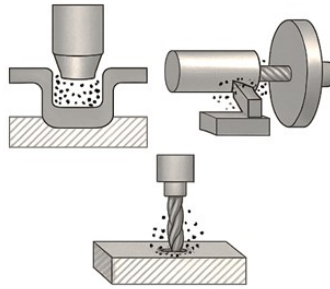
Solid/Nano-Lubricants in Metal Forming and Machining
